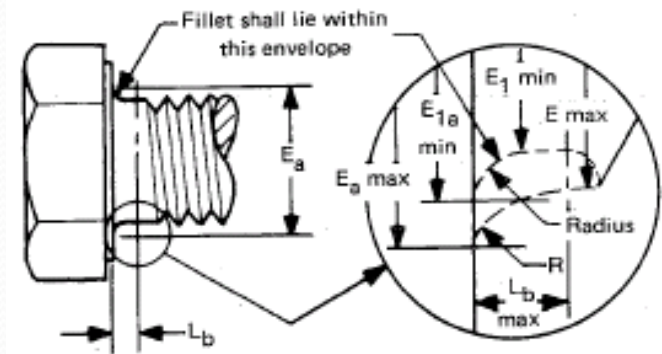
STYLE 2 ELLIPTICAL SHAPED FILLET
